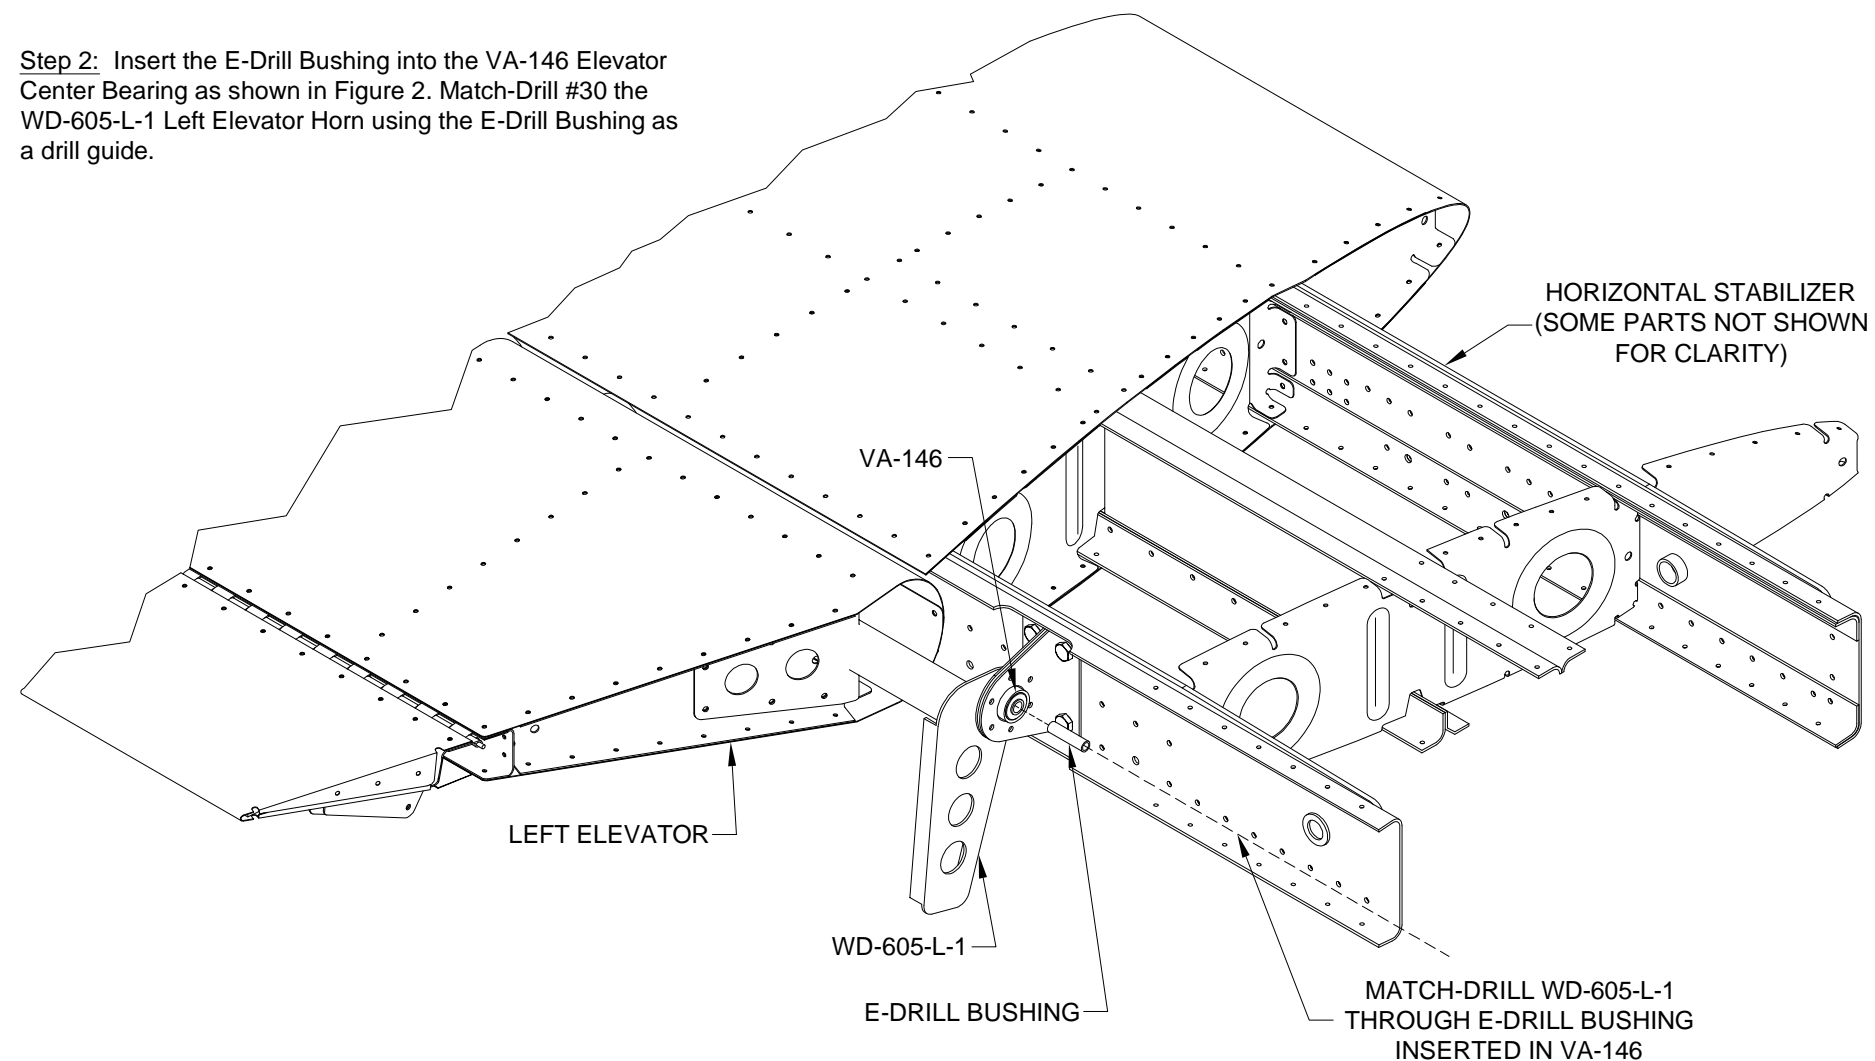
MATCH-DRILL ELEVATOR HORN
